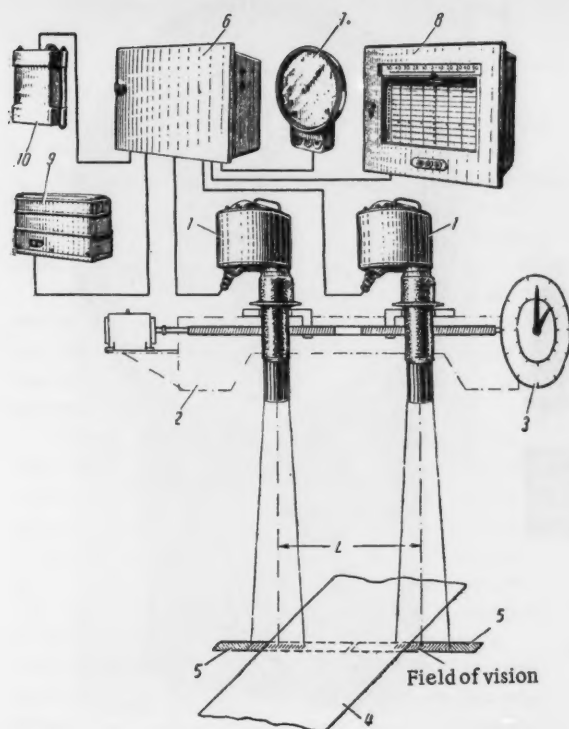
Apparatus for measuring the width of a strip: 1) Photoelectronic measuring heads; 2) head movement mechanism; 3) indicator of the rating of the strip being rolled; 4) strip; 5) illuminator; 6) power pack and amplifier of the scanning system of the indicator; 7) and 8) indicator and recorder of the deviations from the nominal dimensions of the strip; 9) voltage stabilizer; 10) transformer.
